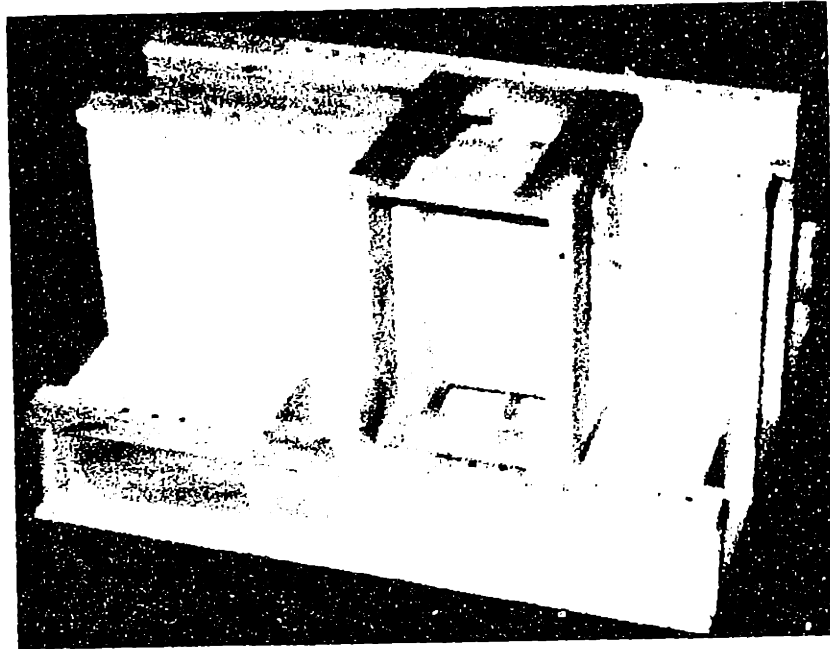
Wooden model of a machine tool type track base with integral kinematic couplings⁶¹.
